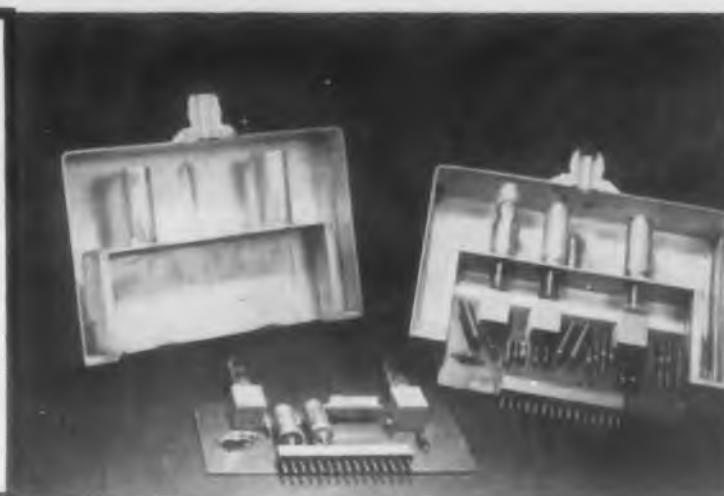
Cutaway view of three tube amplifier and two tubes multidrator employing new cooling techniques.
